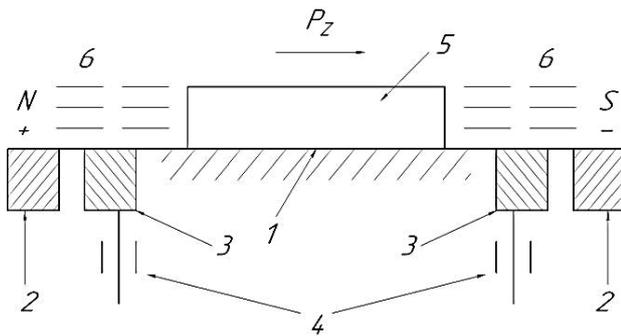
Scheme of workpiece positioning on magnetic table: 1 – magnetic table; 2 и 3 – magnets; 4 – controllers of magnetic field force; 5 – workpiece; 6 – rheological ferromagnetic liquid
